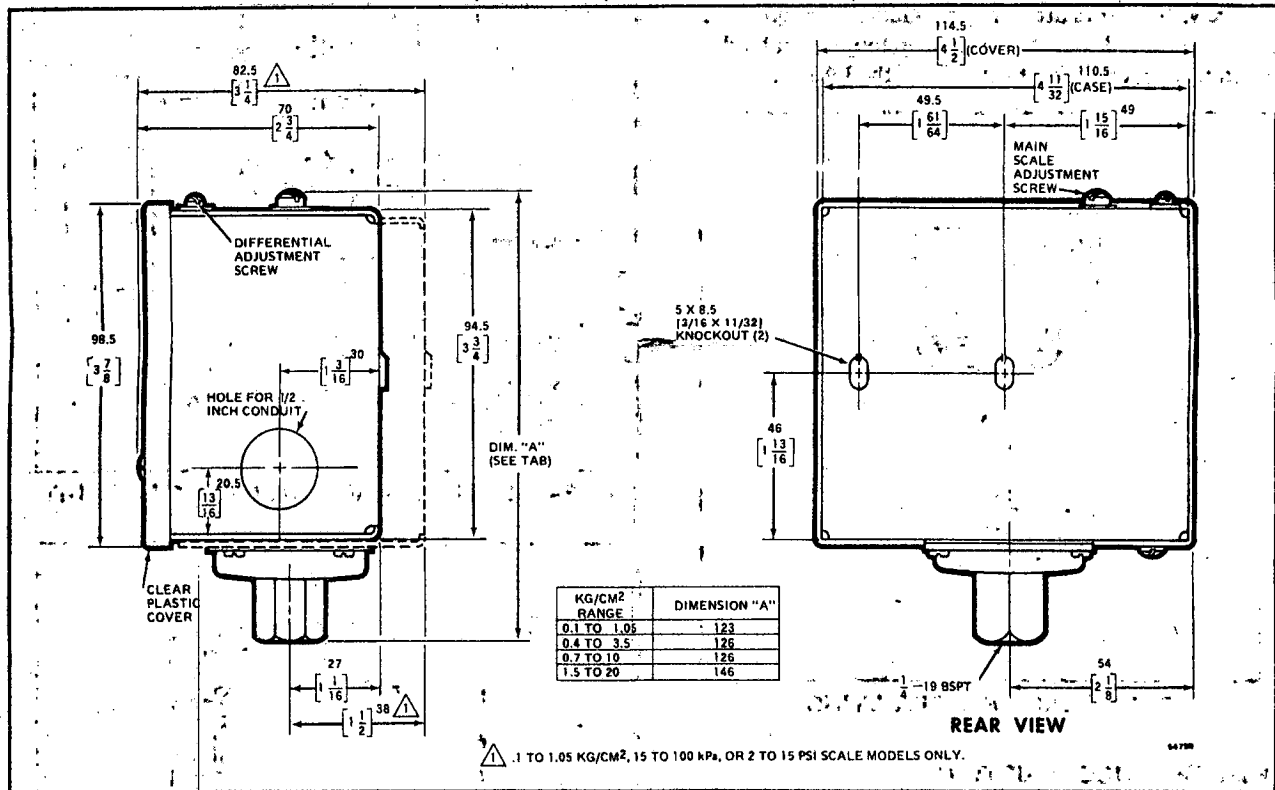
APPROXIMATE DIMENSIONS IN MILLIMETRES [INCHES IN BRACKETS].
